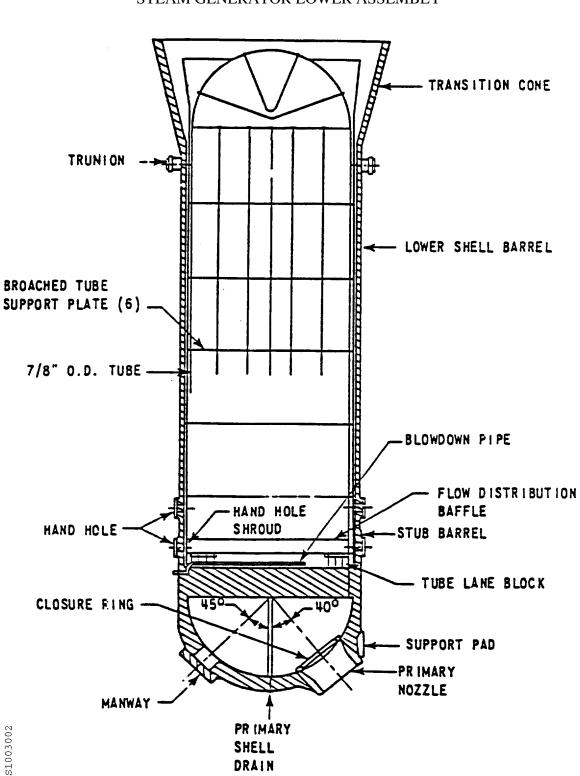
STEAM GENERATOR LOWER ASSEMBLY
